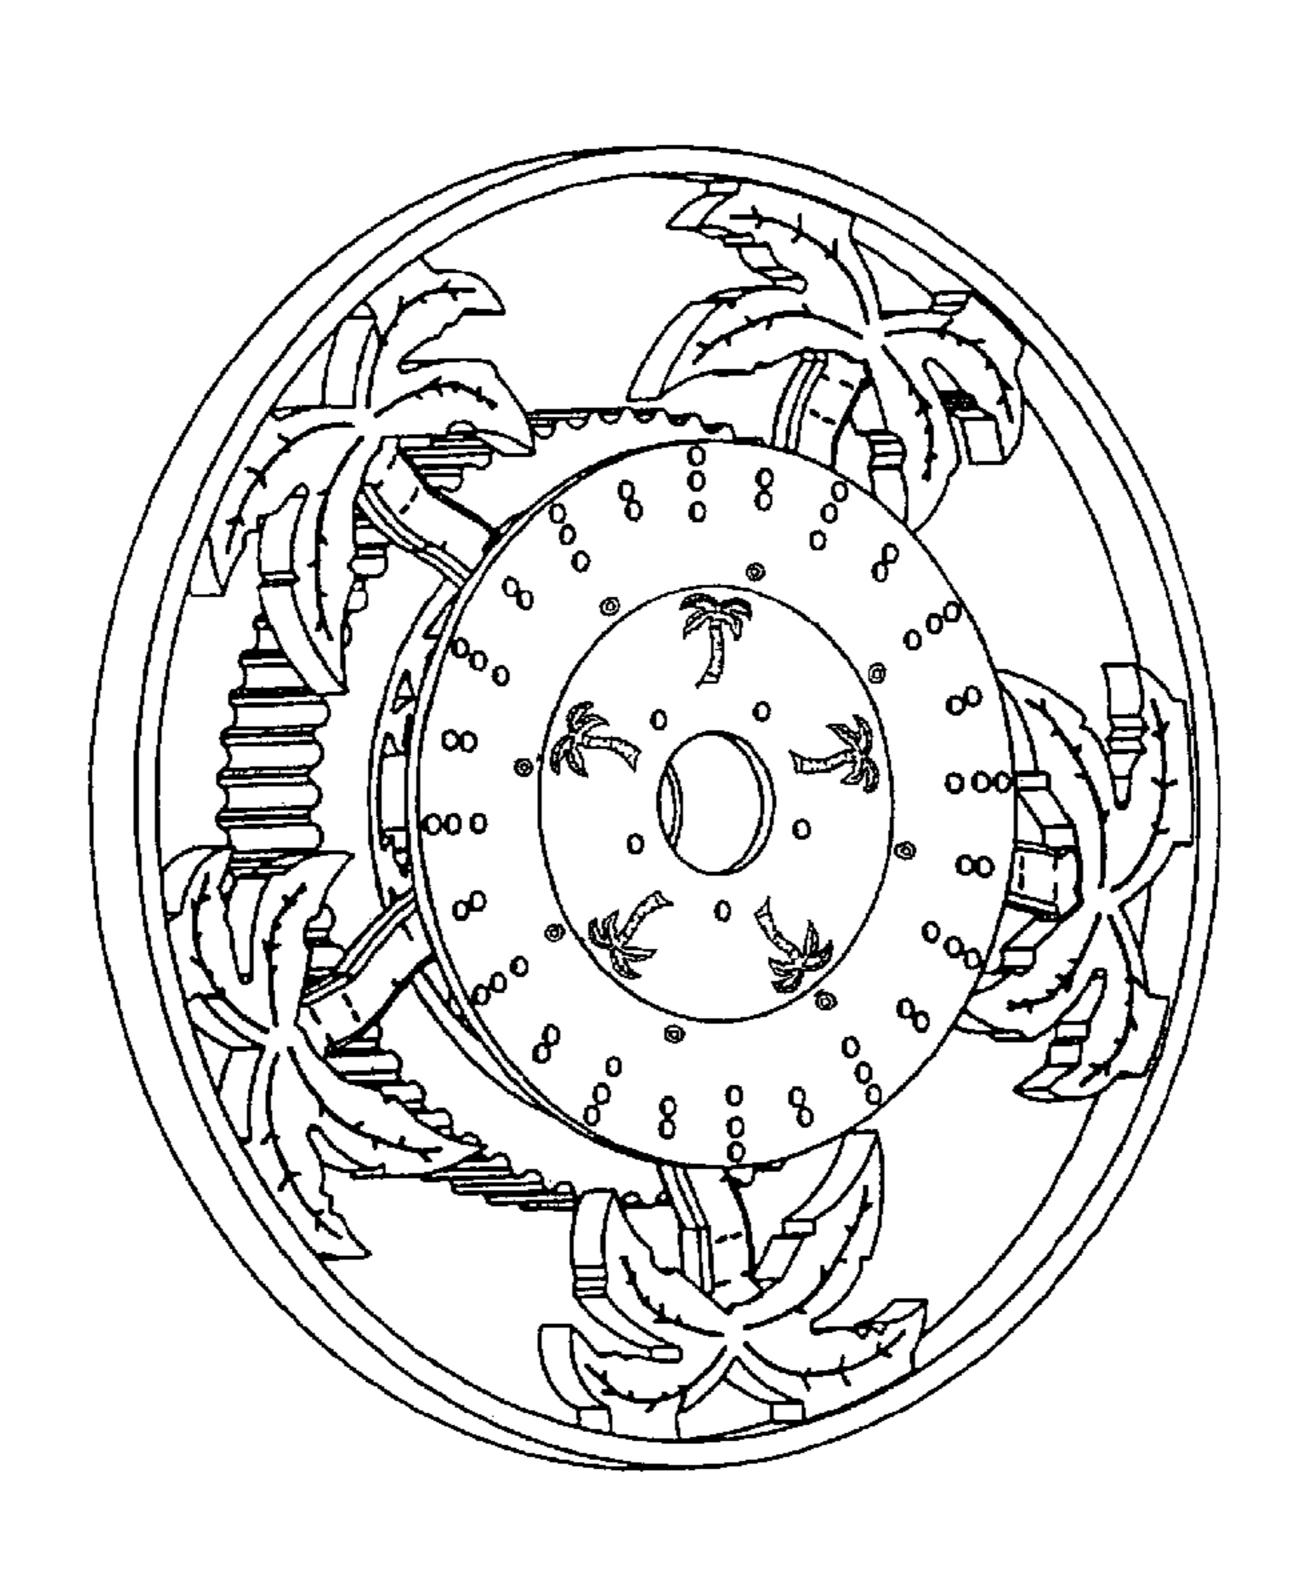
is a head on view of the brake disc of the motorcycle wheel of FIG. 1.
